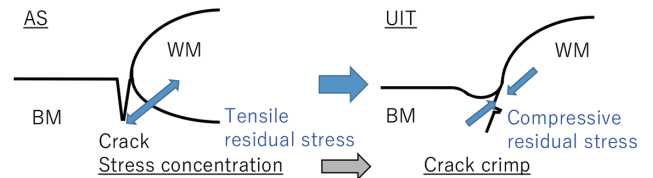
Schematic diagram of enhancement of UIT for the remaining fatigue life of weld bead with crack
